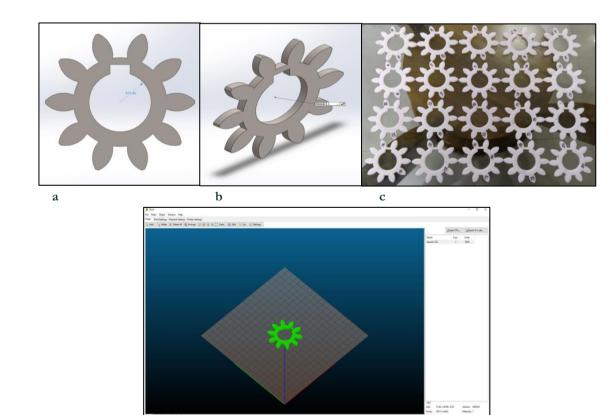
a. Dimension of the test specimen; b. 20 3D printed spur gears; c. conversion of CAD model into G-code through Slic3r software.
